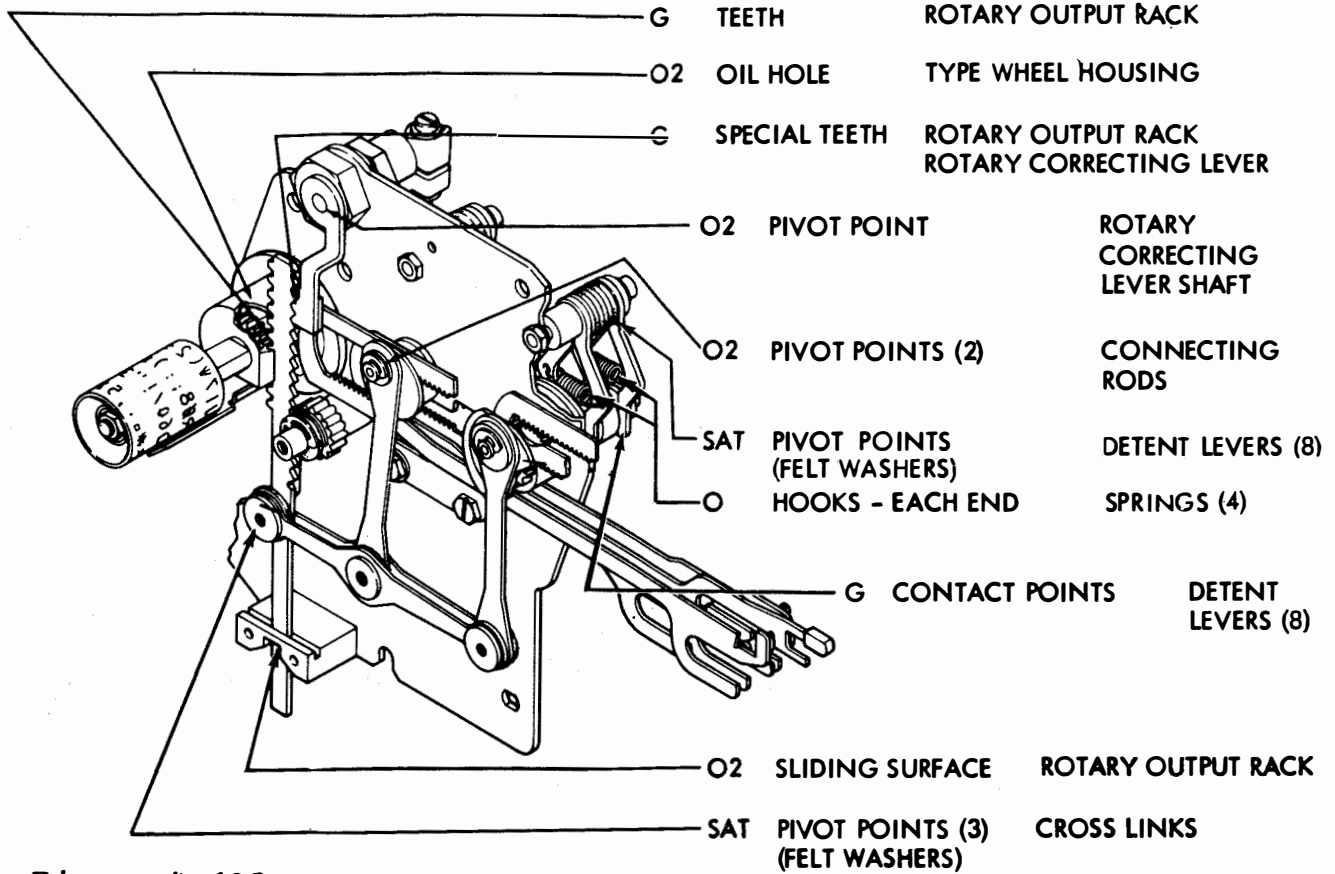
Rotary Positioning Mechanism (Typing Perforator Only)
